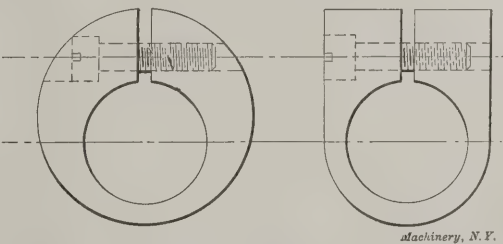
Clamp Collars for Spring Screw Threading Dies.
